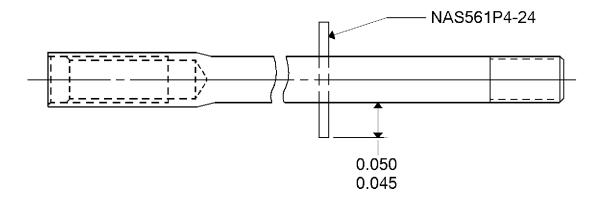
Fabrication of Expandable Pin Cleaning Tool
